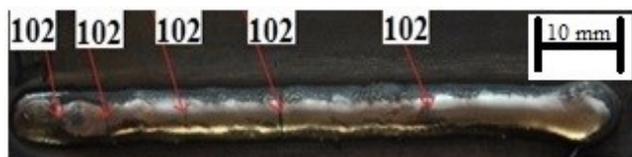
Cracks in the single bead with describe according to norm PN EN ISO 6520-1
